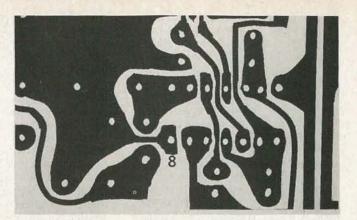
IF TRACES MUST BE ROUTED between IC pads, elongate the pads to make soldering the components easier later on.
